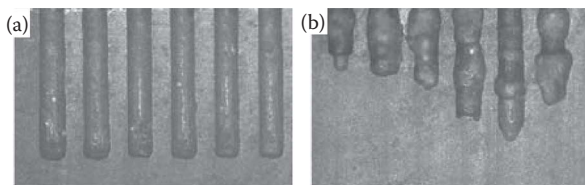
(a) Uniform depth of micro-holes and tool wear for micro-EDM of aluminum workpiece using tube electrodes indicating better accuracy; (b) nonuniform depth of micro-holes and tool wear when rod electrodes are used
